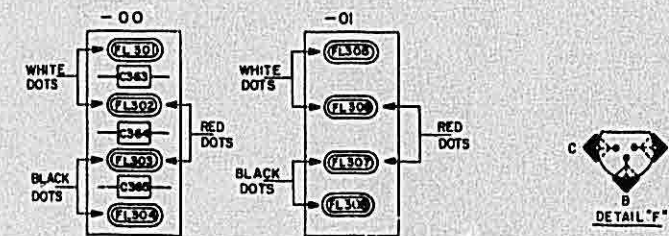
RECEIVER BOARD ASSEMBLY
